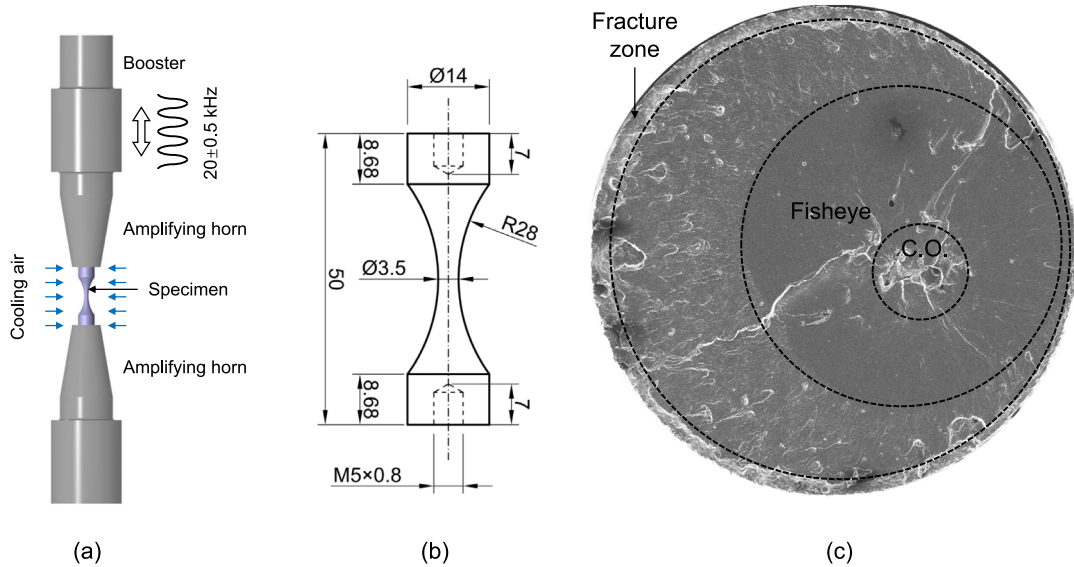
(a) Ultrasonic fatigue testing device. (b) Dimensions of the hourglass specimen. (c) Fracture surface morphology of the specimen with the stress amplitude of 60 MPa and fatigue life of 3.63×10^8 .
